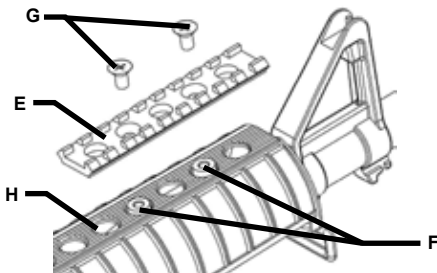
NVEC#16 Installation, Steps 7-8 Exploded
